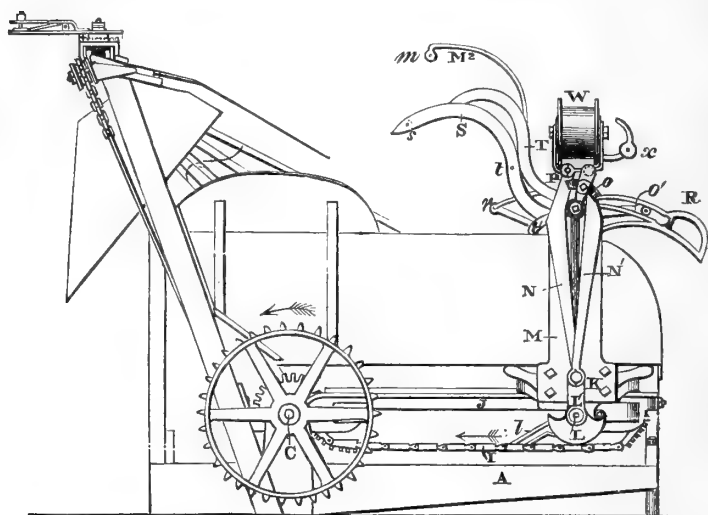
FRONT SECTIONAL ELEVATION OF THE
